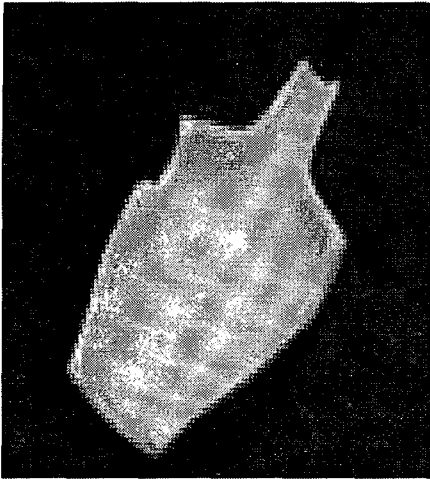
(b) Finished 3D thin-walled parts (ABS, lower-side part)
